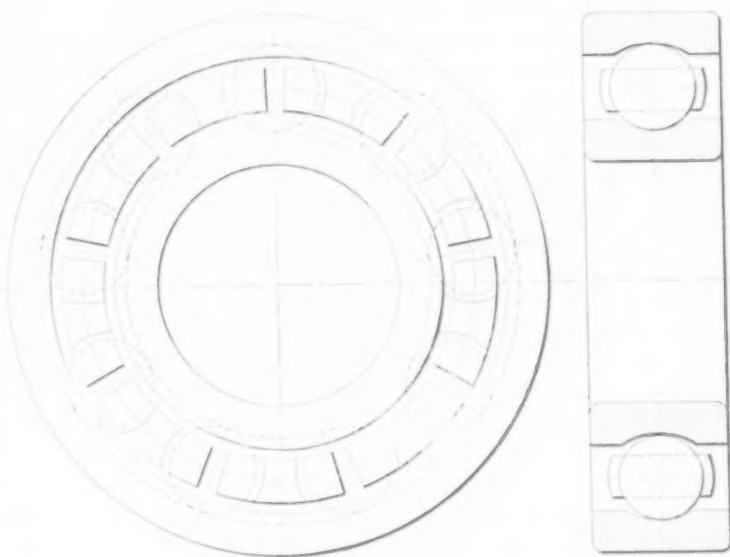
ELEVATION AND CROSS SECTION OF THE HESS-BRIGHT BALL BEARING
